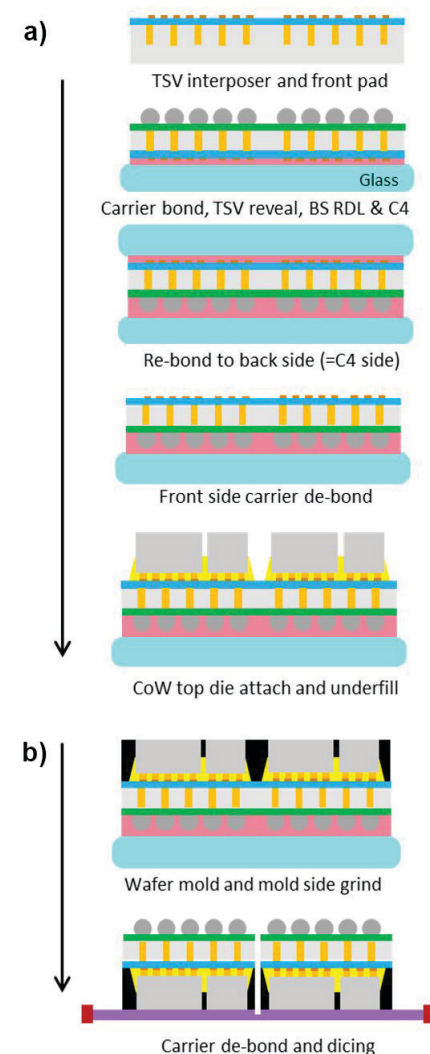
a) MEOL process flow and die attach; and b) wafer finish option of molded wafer format for CoW packaging.
